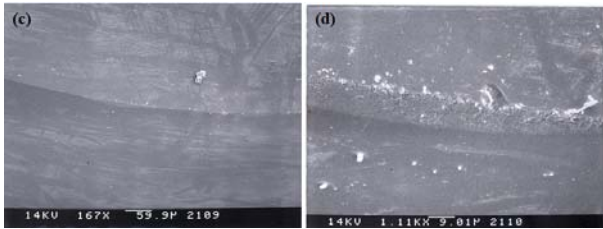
(c) & (d): SEM images of the cutting edge radius of the diamond tool after machining (Pass #16; 250nm depth of cut with a 1 μ m/rev feed).
